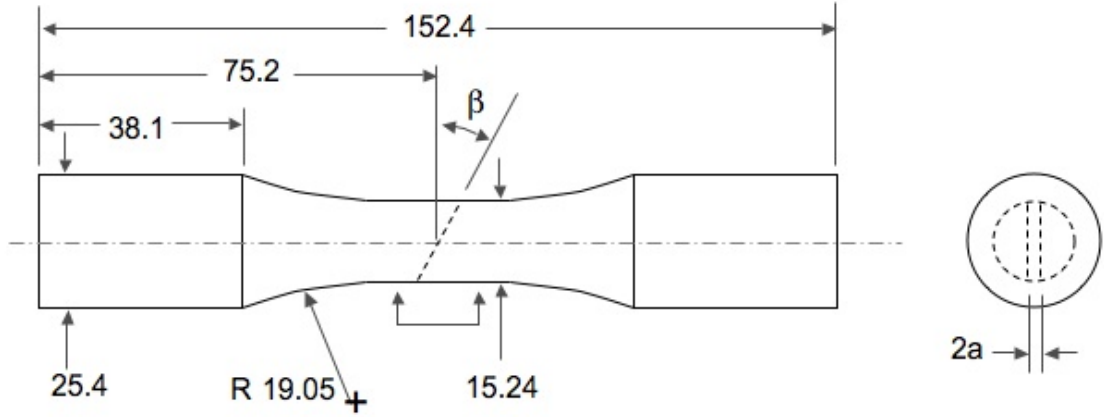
Drawing of inclined through-crack round (ITCR) specimen design (dimensions in mm).
